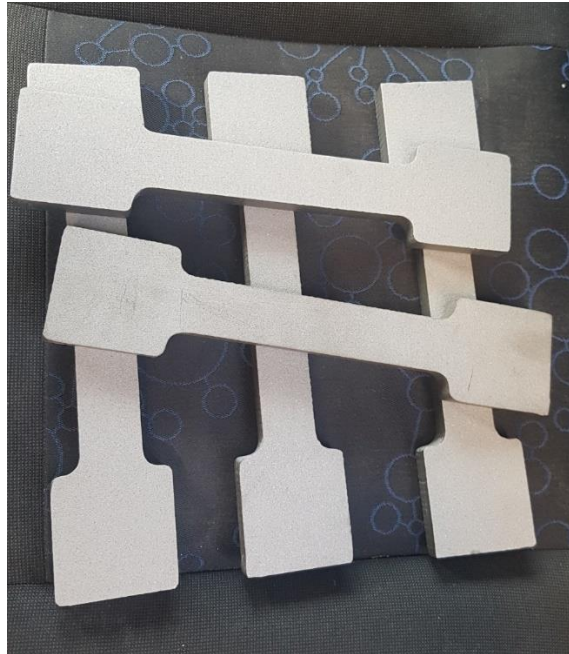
Specimens for tensile testing of BRB steel core material
